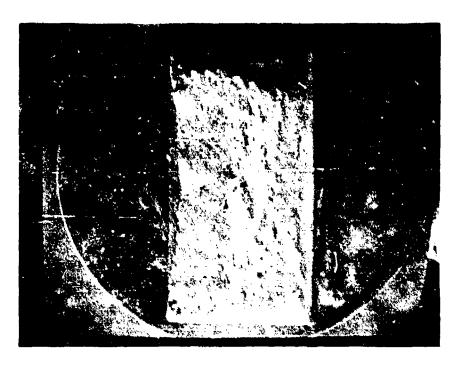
Tensile fracture surface of hydrogen-embrittled A-516 steel, 11x.
